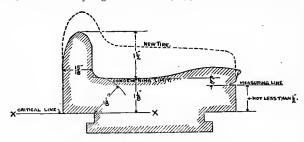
STEEL TIRE, RETAINING RING FASTENING.
